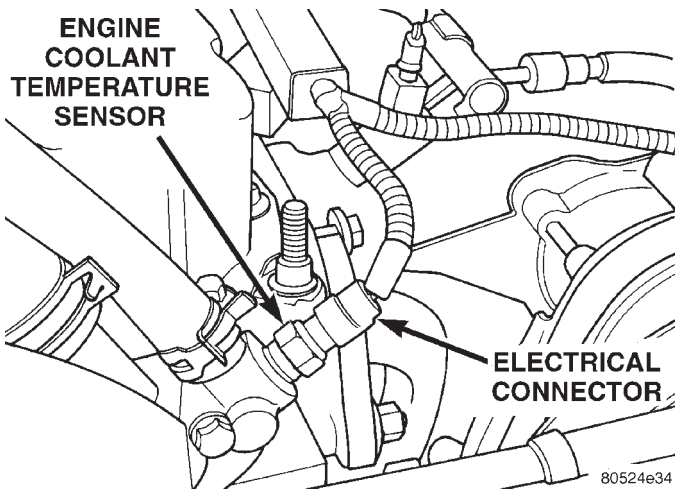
Engine Coolant Temperature Sensor—4.0L Engine
